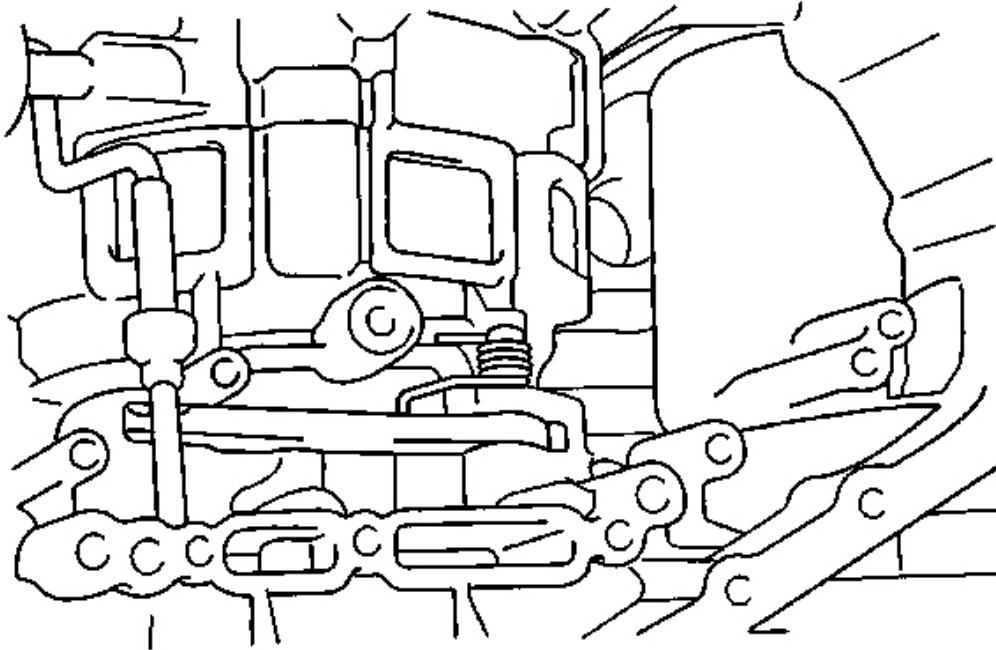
Parking Lock Pawl, Shaft & Torsion Spring
